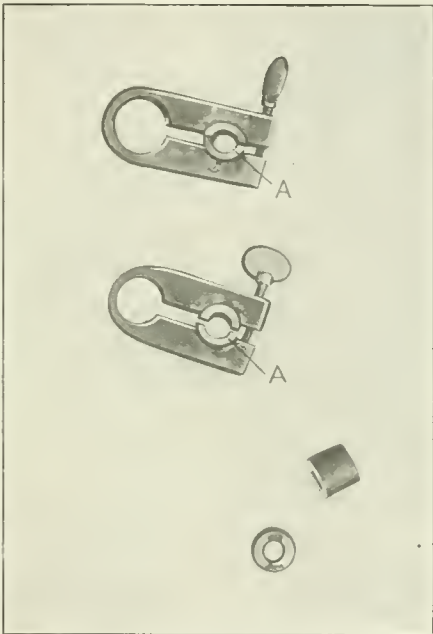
Laps and Holders used in Finishing Bearings to Size
